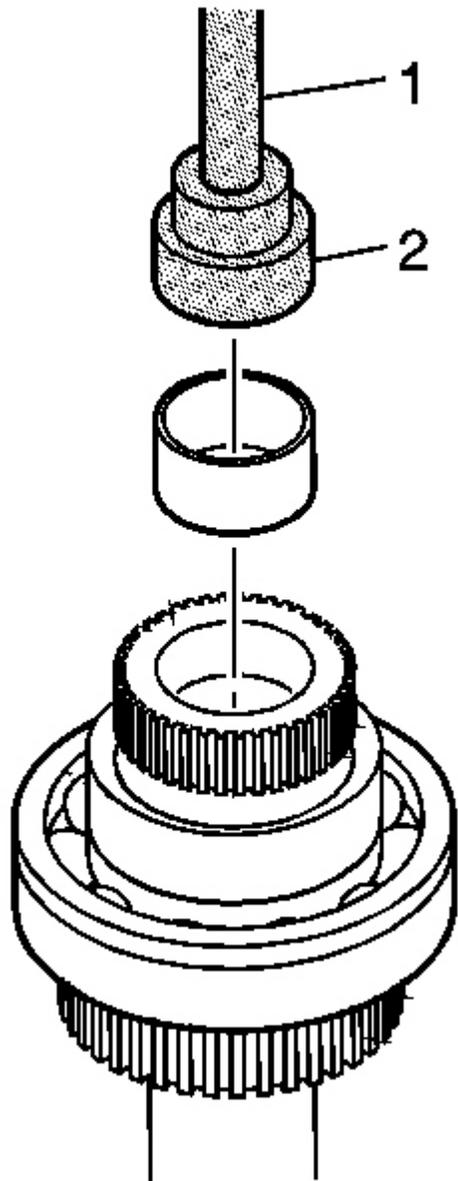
Installing Mainshaft Rear Support Bushing In Rear Output Shaft
